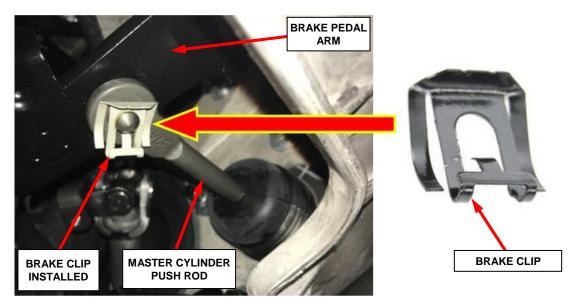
Install Clip Securing the Brake Master Cylinder Push Rod to the Brake Pedal Arm
